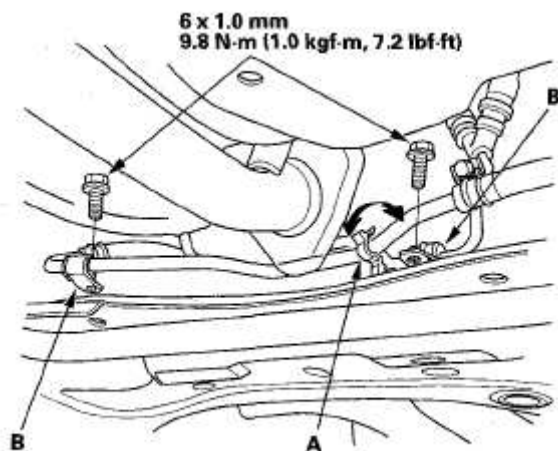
Identifying Power Steering (P/S) Line On Clamp (With Torque Specifications)
